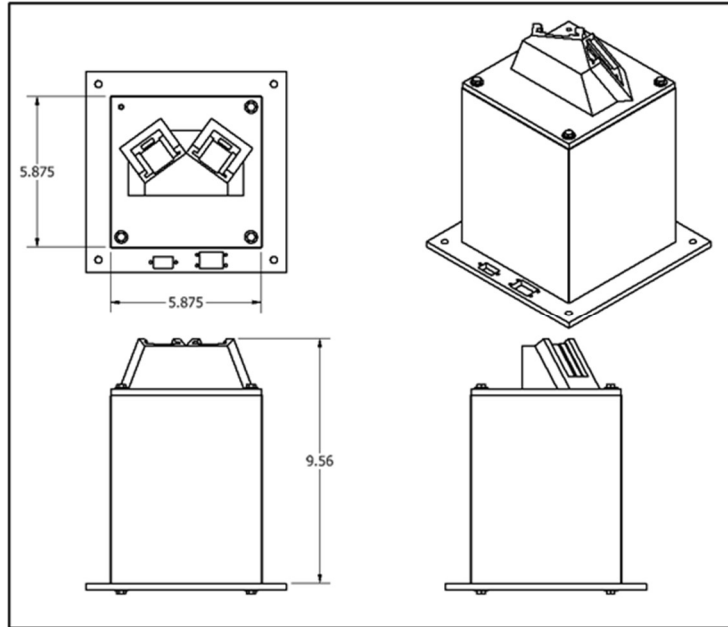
Dimensions and design of main payload exterior. Shown mounted to payload plate.
